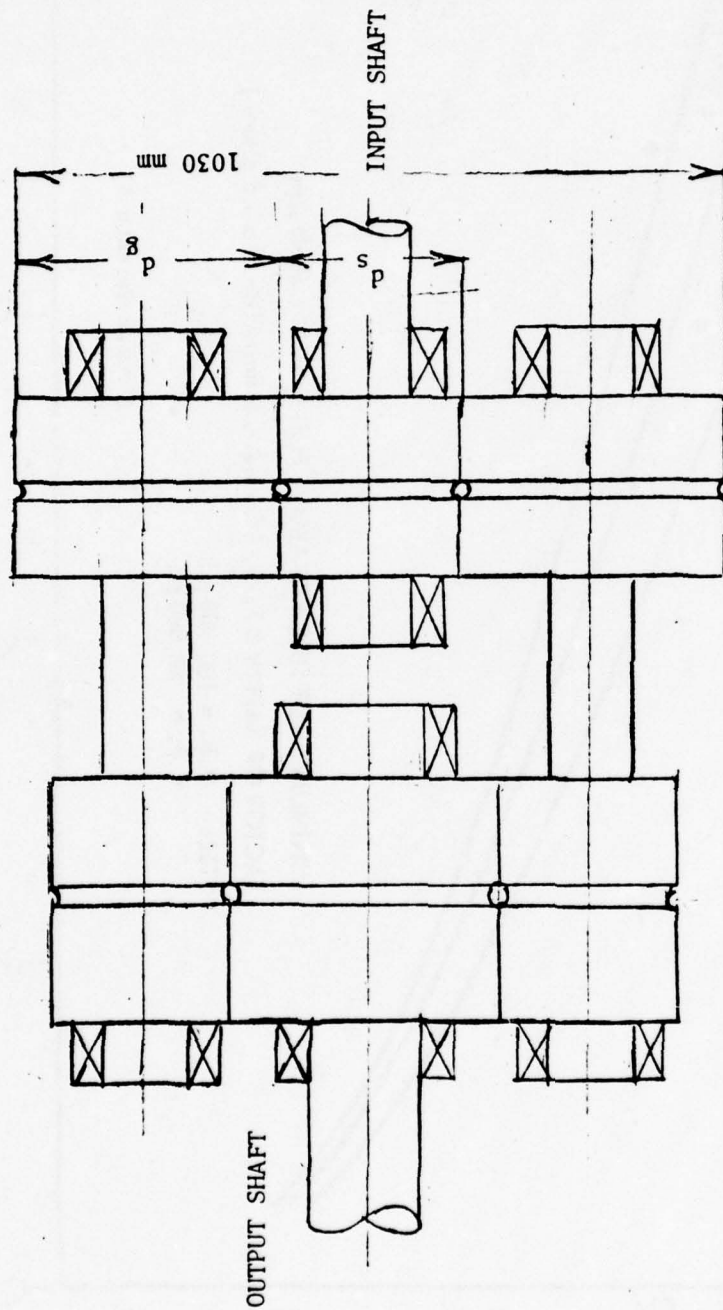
Schematic of Multi Branched Concentric Double Reduction Gearbox
